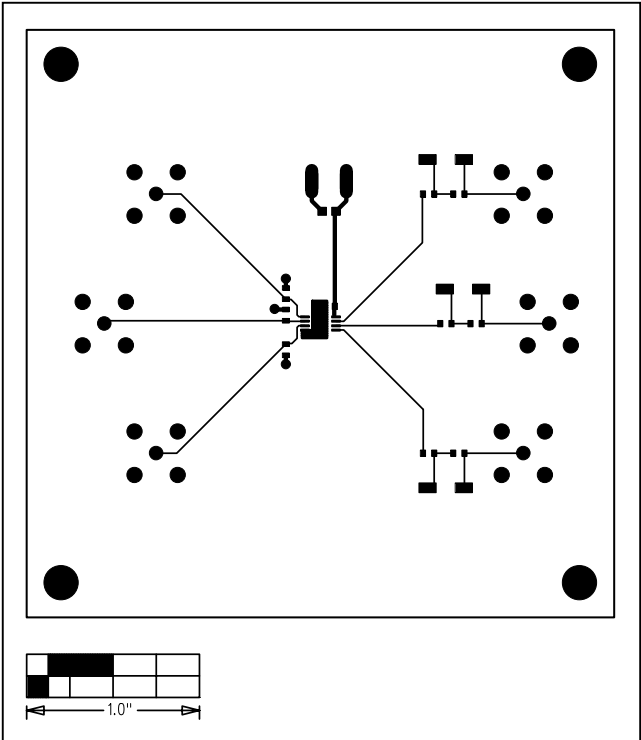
MAX9584 EV Kit PCB Layout—Component Side
